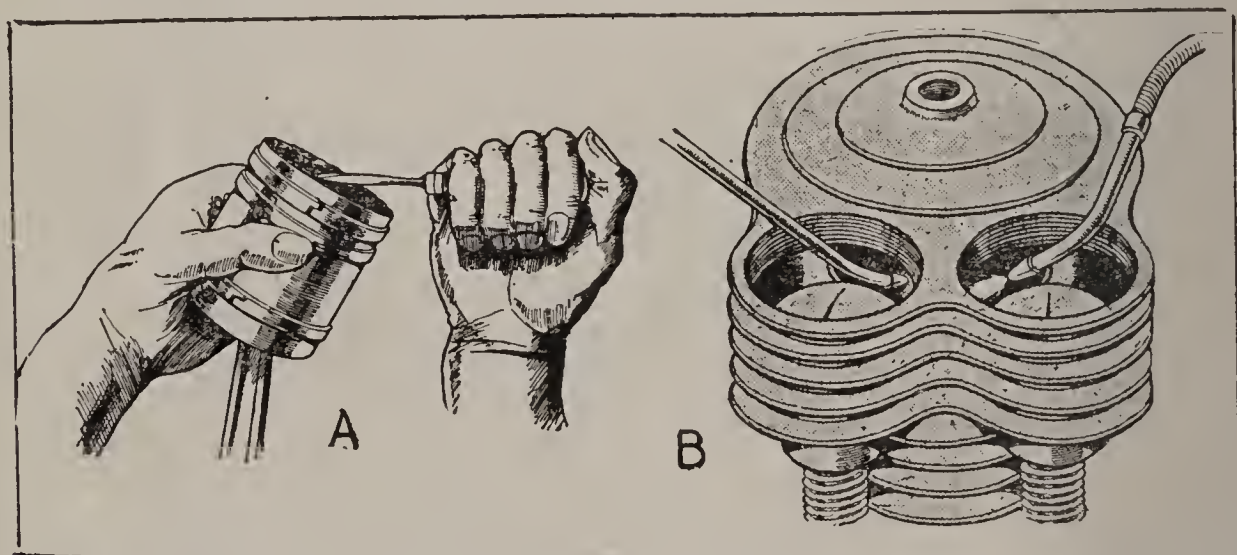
Methods of Removing Carbon Deposits From Piston Top or Combustion Chamber Interior.
